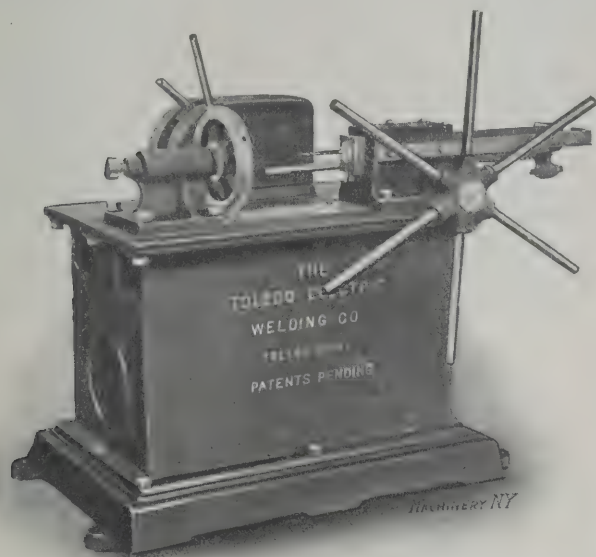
Machine for Electrically Welding Small Drills to their Shanks
